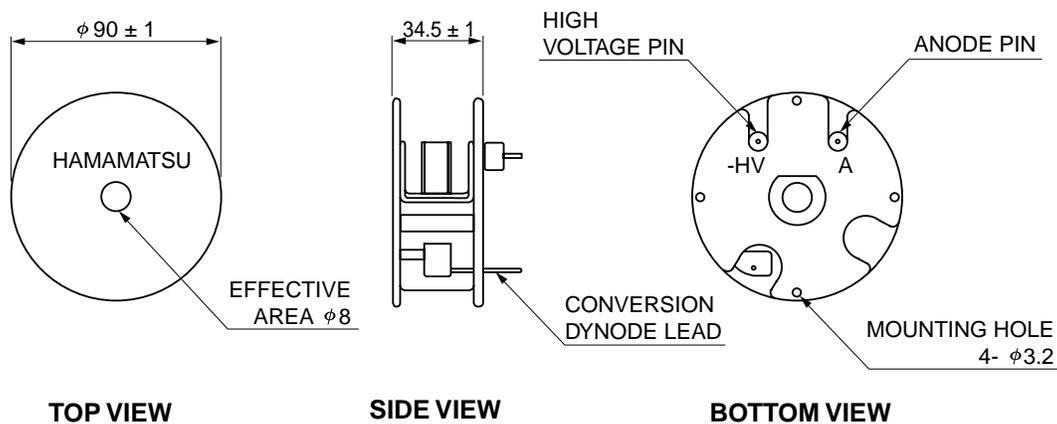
R5150-70 Dimensional Outlines (Unit: mm)
